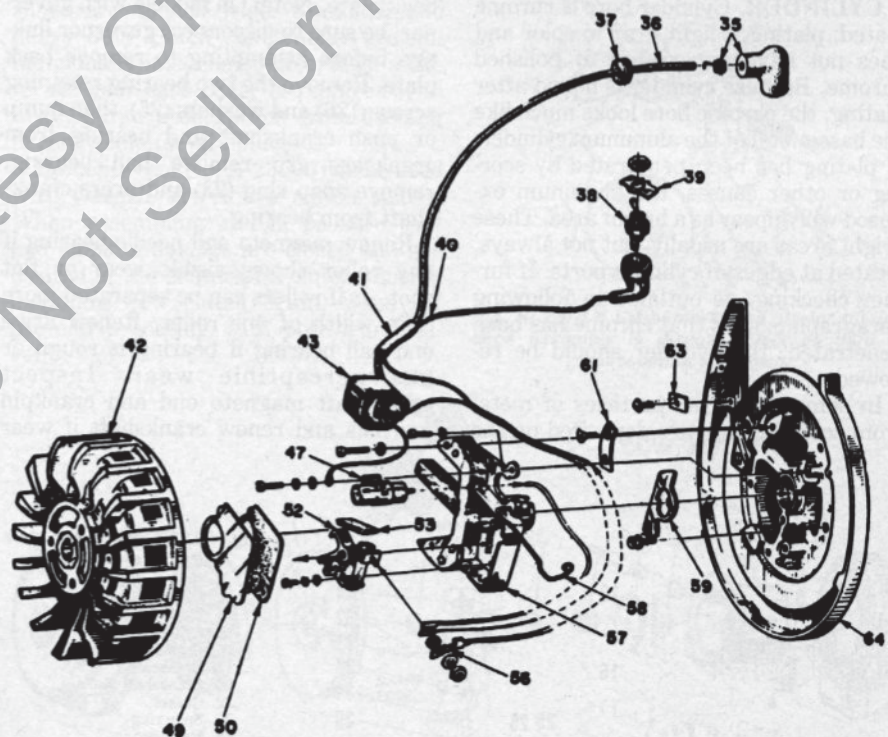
Exploded view of typical REPCO magneto used on all models. Rotor (flywheel) has three tapped holes for installation of remover (Homelite tool No. AA-22560). Magneto back plate (64) supports crankshaft seal and needle bearing.
